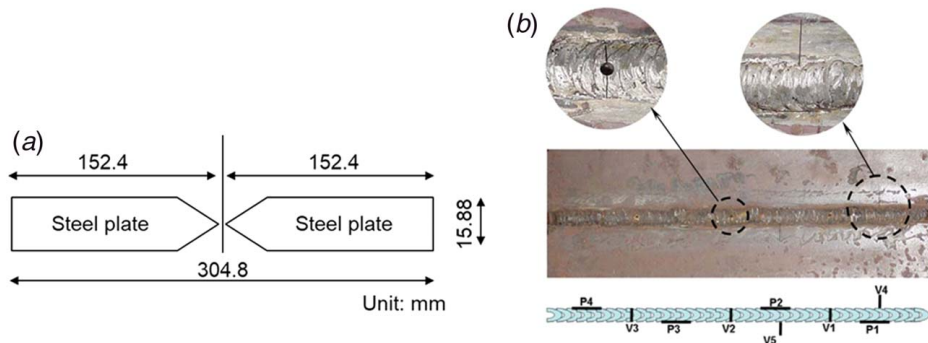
Specimen preparation: (a) schematic of two steel plates before being joined by GMAW and (b) zoom in pictures of the welded area with EDM starter cracks after the GMAW joining [1]
